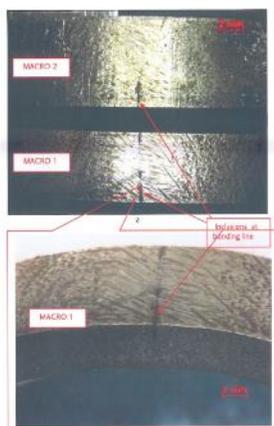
Inclusion at pipe weld seam on vintage NPS 2 gas main
